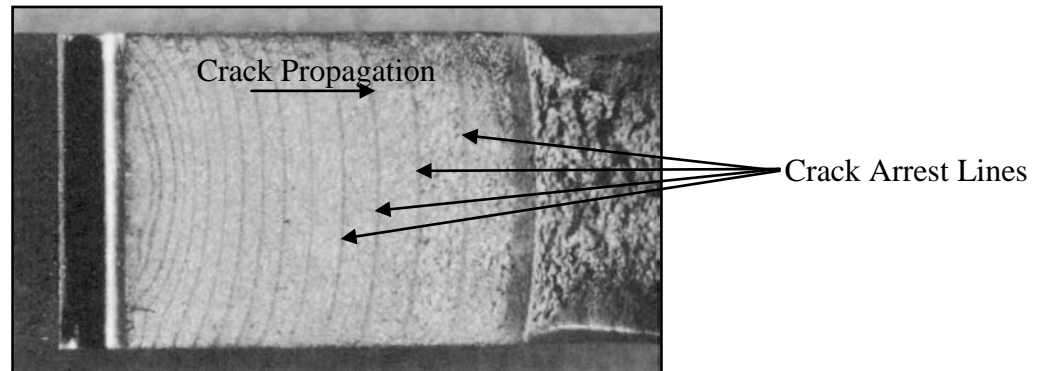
Fracture Surface of 3.5 NiCrMoV Forged Steel<sup>10</sup>
